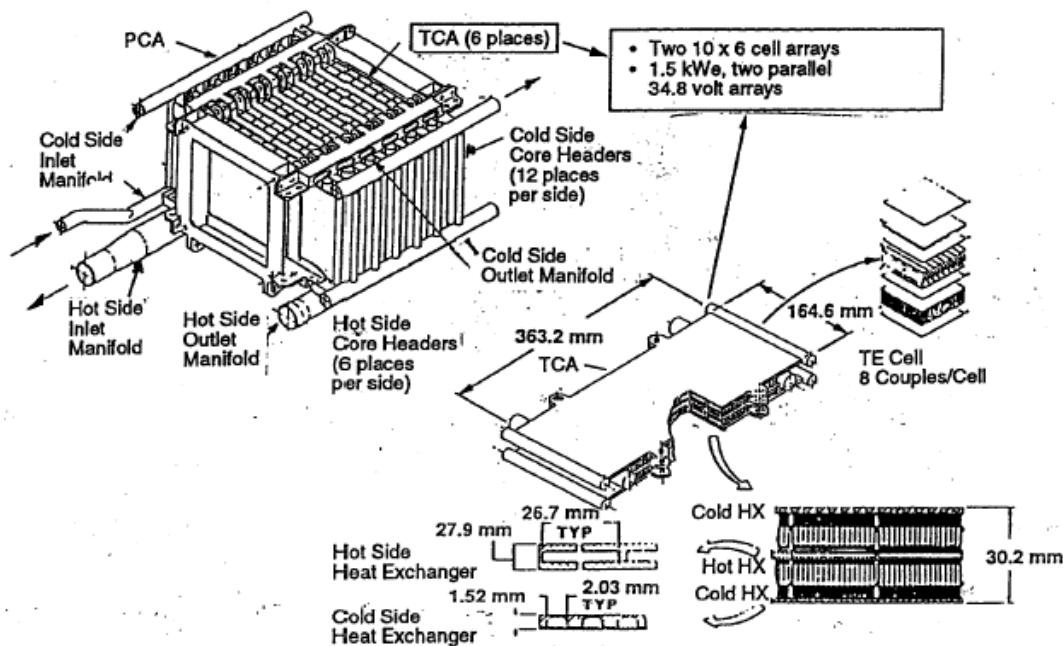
SP-100 Power Conversion Assembly [from Ref. 16, p. 8]
